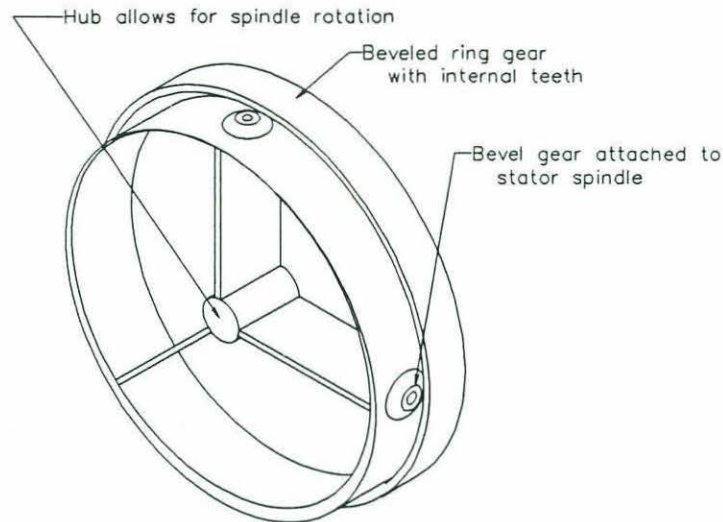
Variable pitch stators (propeller not shown) using beveled ring gear.
